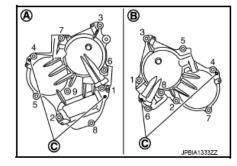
Intake Valve Timing Control Covers Mounting Bolts Tightening Sequence And Locating Dowel Pin Holes
